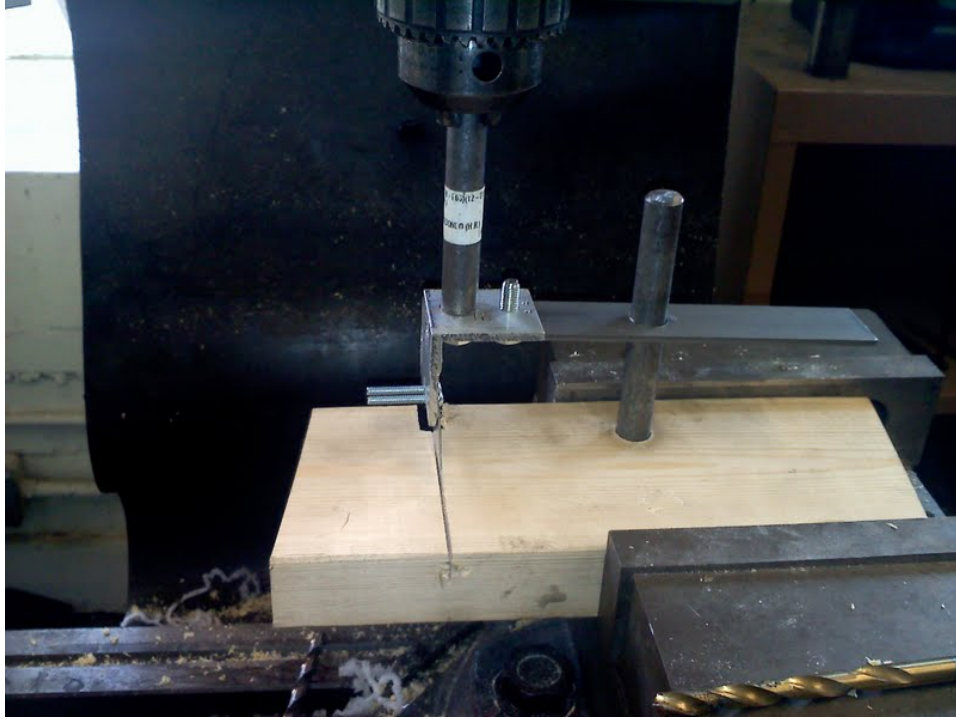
Prototype Shear Jig Mounted In Drill Press
